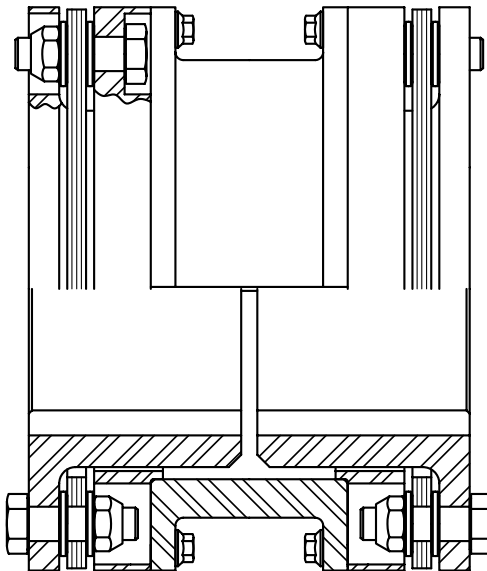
Metal disk coupling with flanged, tubular spacer (Thomas Coupling Div/Rexnord)
